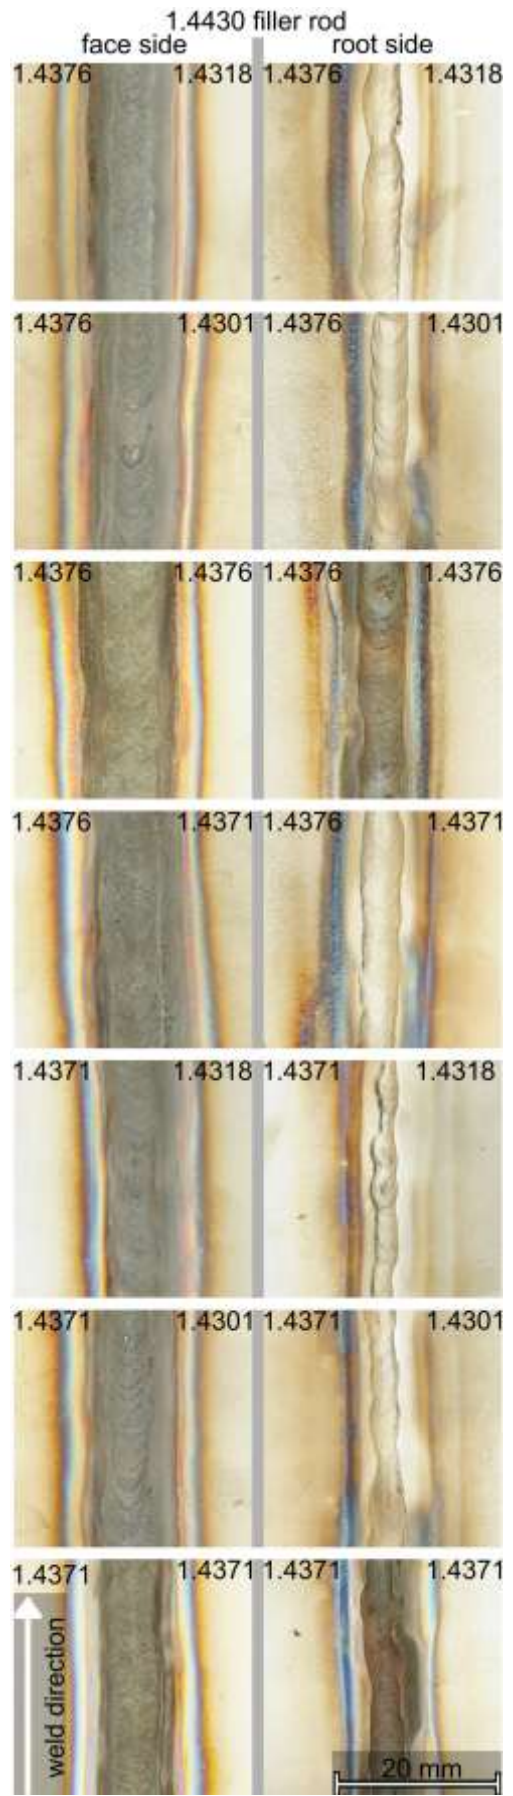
Macroimages from the face side (left) and root side (right) of the different joints welded with 1.4430 filler material
